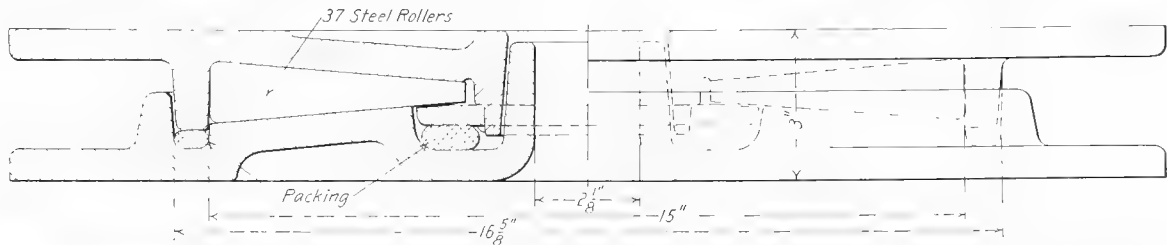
Barber Roller Center Bearing, 15 in. Diameter, 37 Rollers. Standard Car Truck Company
